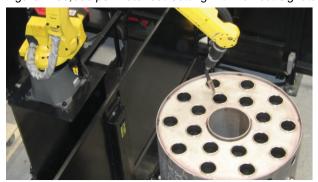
TIG Welding in progress with 6-axis Robotic
